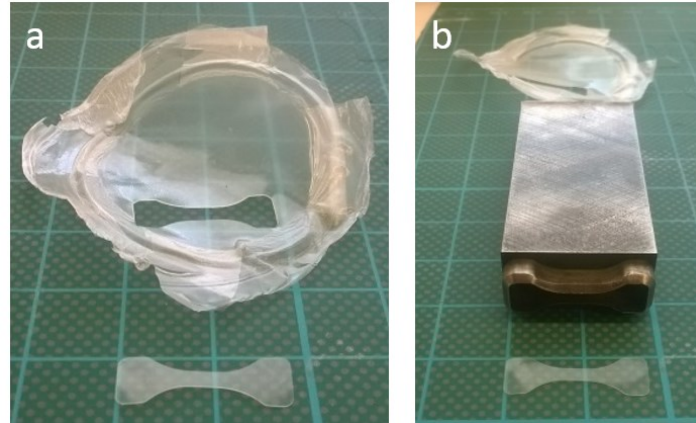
Samples in a typical bone form stamped out of composite (a) and stamp used for the experiments (b).
